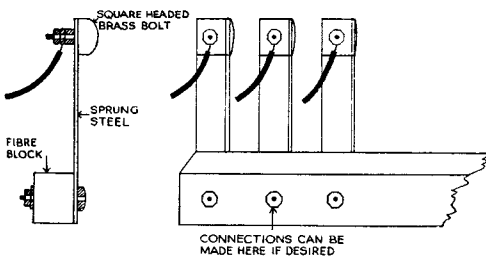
FINGERS FOR FLASHING SIGN SWITCH.
